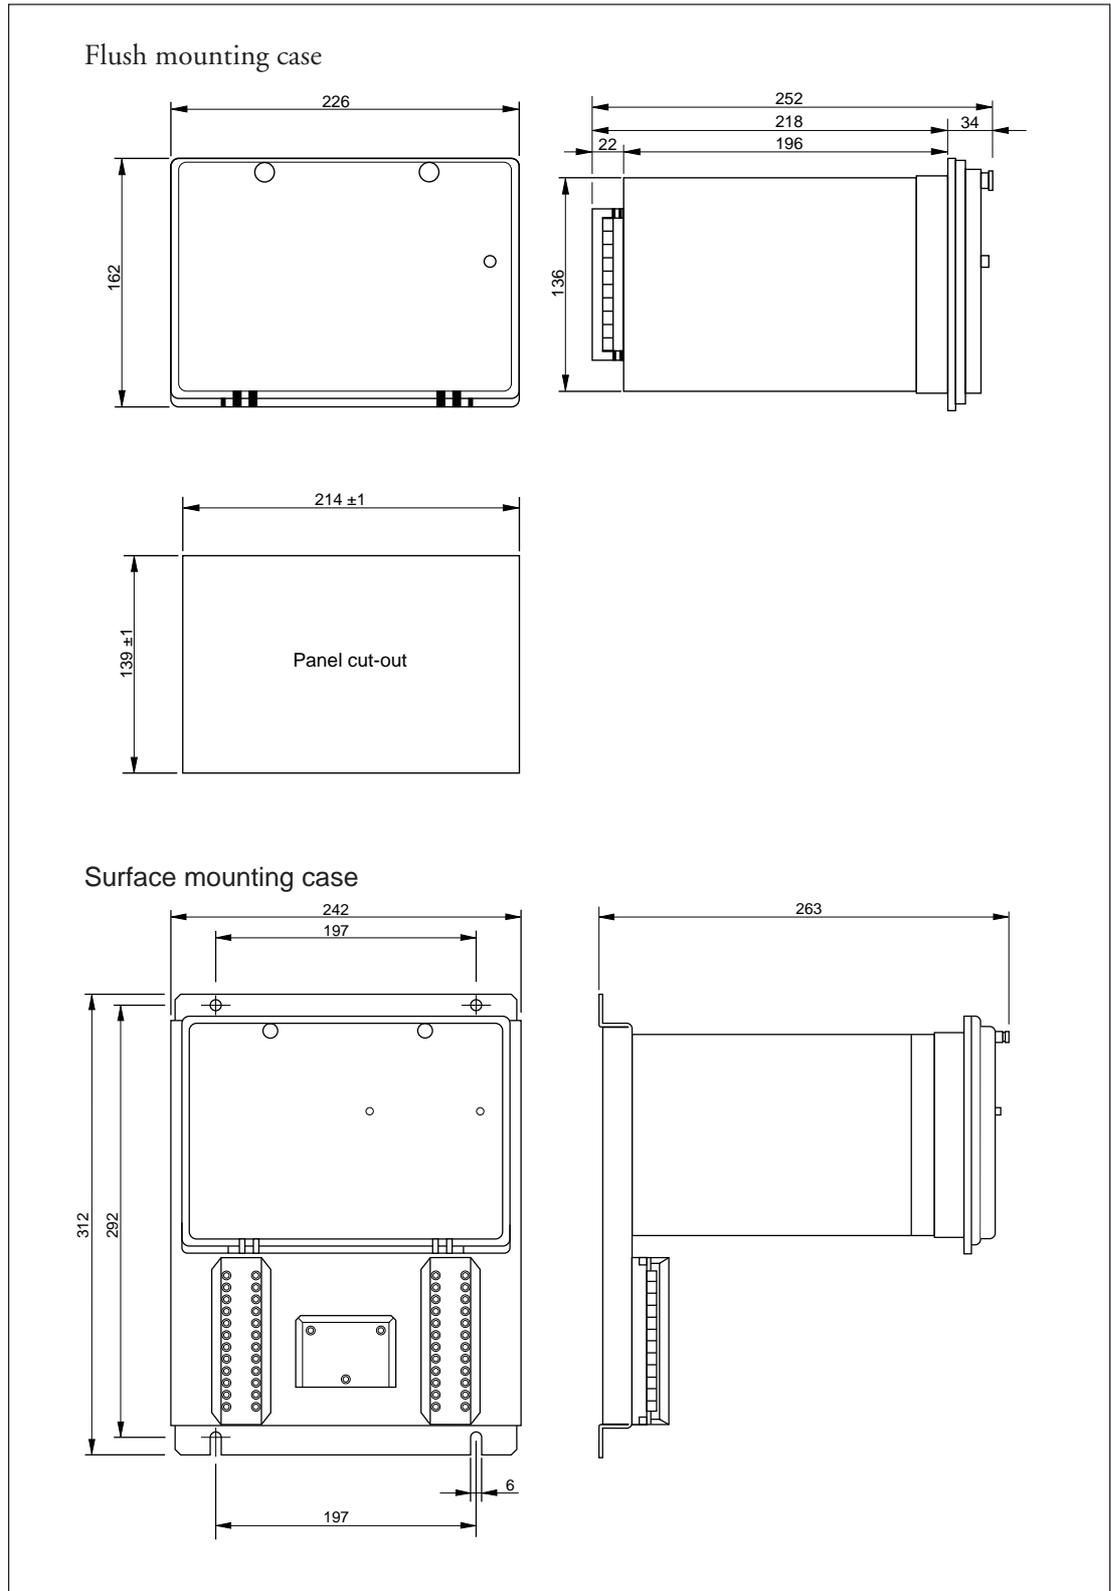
Mounting and dimension drawings of feeder terminals SPAC 310 C and SPAC 312 C
